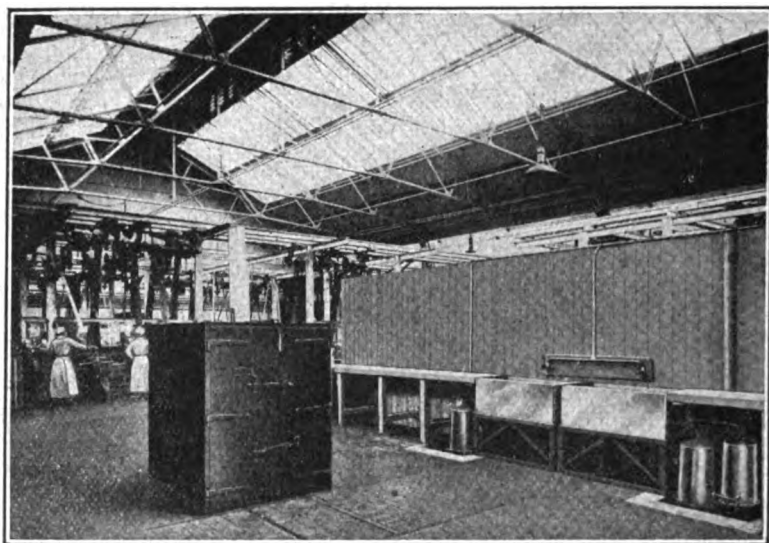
SHELL WASHING AND DRYING PLANT.
